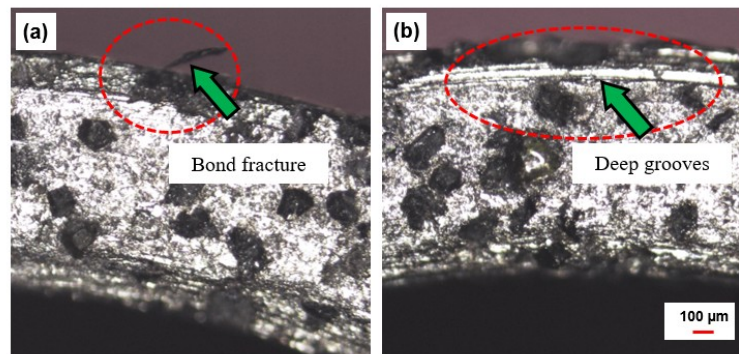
Tool wear signatures after conventional machining. (a) Bond fracture; (b) Long deep grooves.
